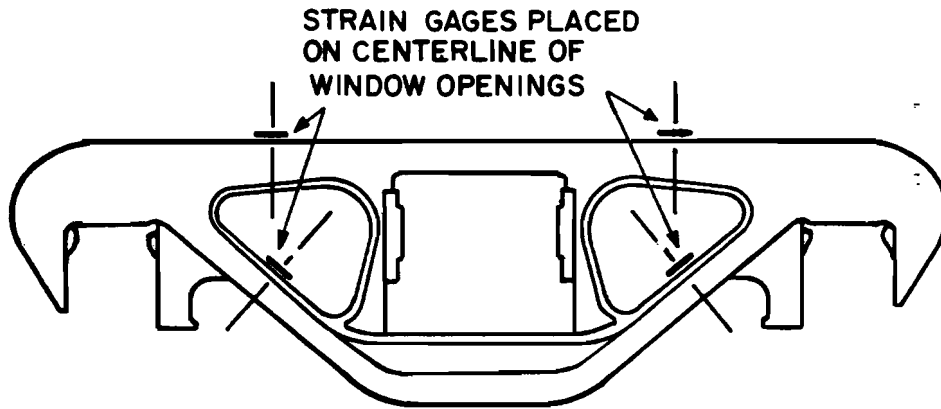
PLACEMENT OF SIDE FRAME STRAIN GAGES. Gages on each side frame are wired into a four active arm bridge; Channel 27 right side frame, Channel 28 left side frame.
